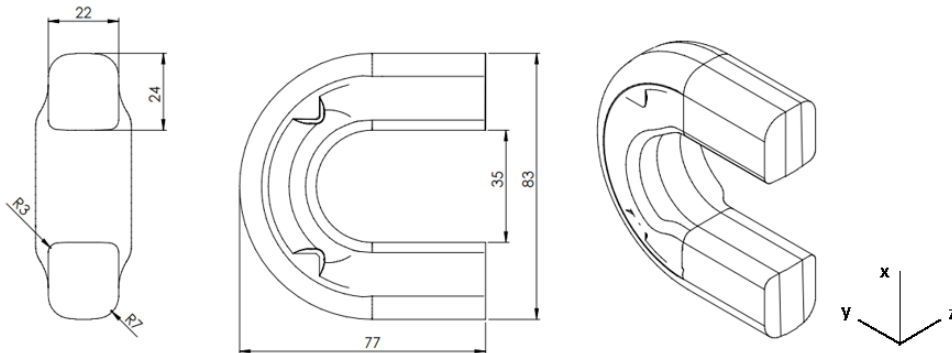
Technical drawing of the used half chain link to be welded.
